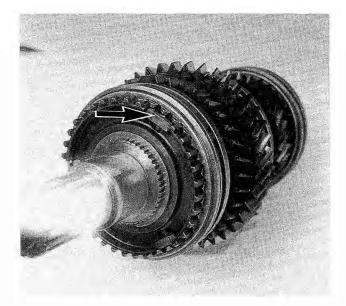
Guide sleeve operating dog correctly installed with beveled edge facing operating sleeve (arrow). On early transmissions, dog with stepped side faces operating sleeve.
